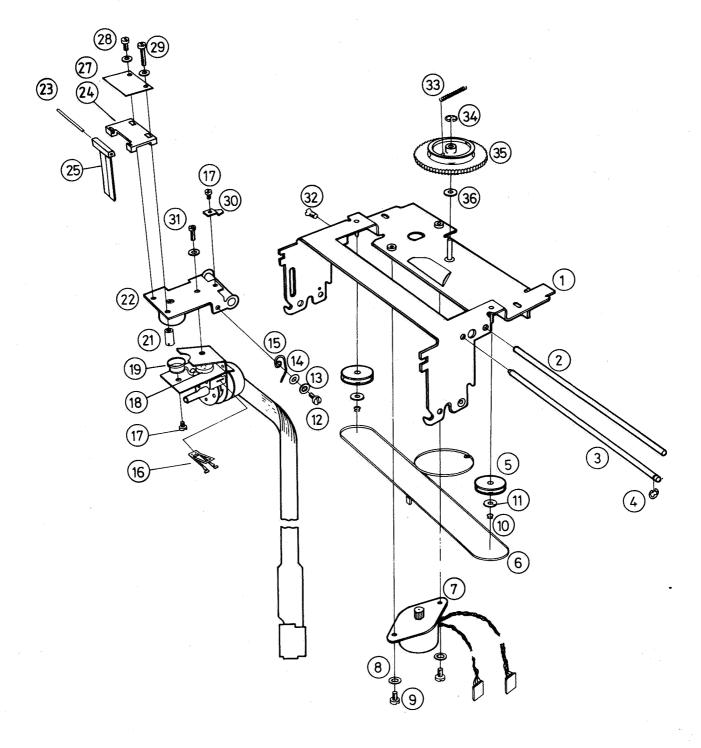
EXPLODED VIEW OF PEN TRAY ASSEMBLY (Drawing No.HC233109, Issue 1)
